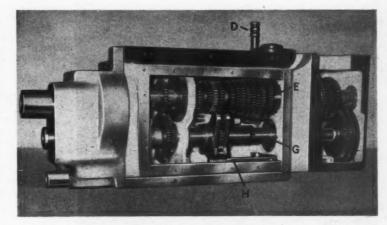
View of Synchromatic feed gearbox from the rear. This gearbox is totally enclosed, when fitted to a lathe, and provides for cutting 384 different threads without the use of change wheels
